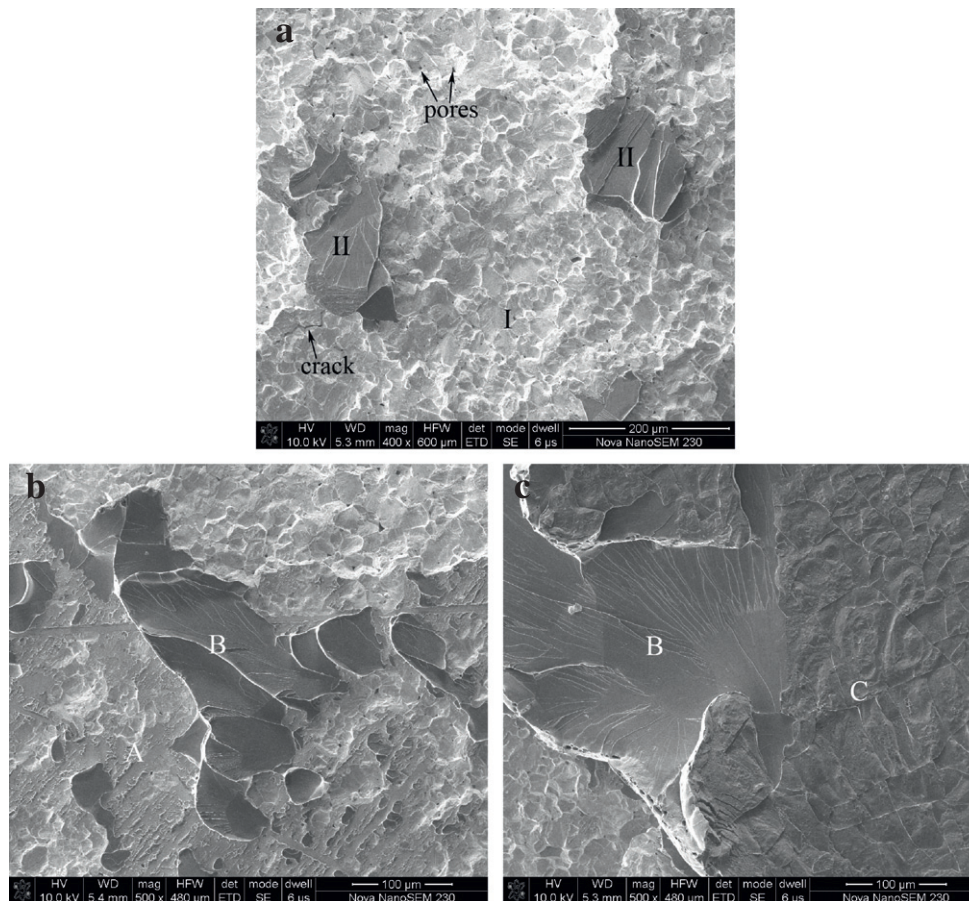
Fracture surface of the W/V/Ni/steel joint bonded after tensile test. The fracture on the W side is divided into regions I and II. (a) Representative fractured surface, (b) and (c) the different fracture surfaces of region II.
